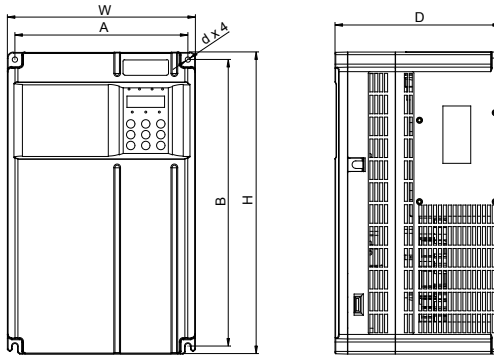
Overall dimensions of MD500T45GB to MD500T160G (sheet metal housing)
